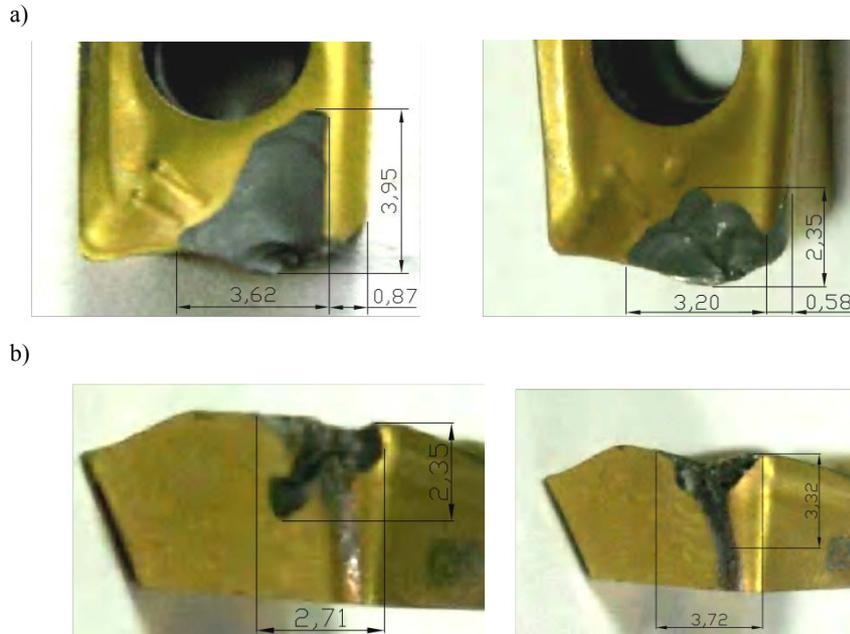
Damages of the machining plates (R390-11 T3 16M-PM 1025) before optimization: a) tool rake, b) tool flank
